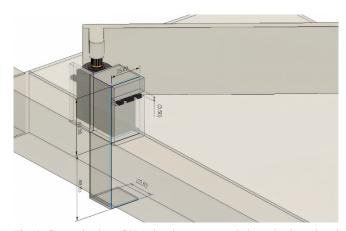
Isometric view of 3D-printed sorter arm and clamp that is equipped on the MG966R servo motor placed on sorting conveyor-side.
